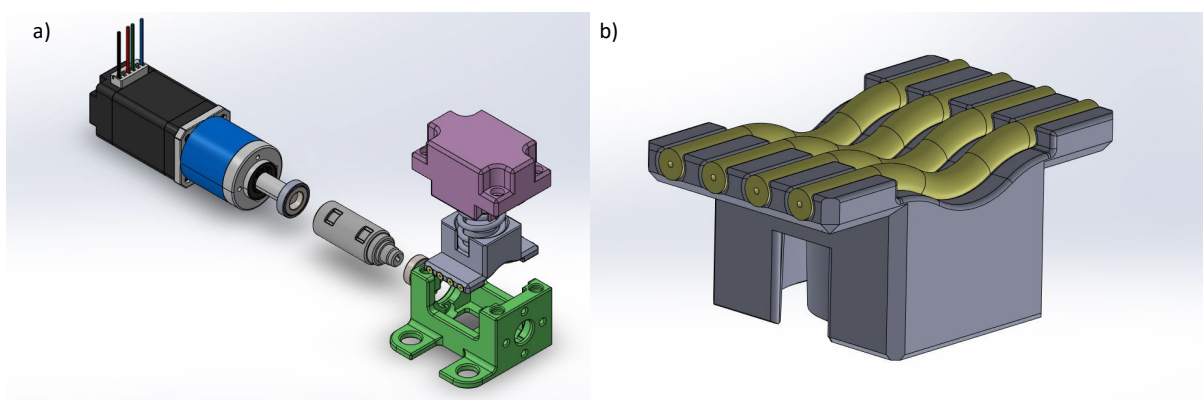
a) Exploded View of pump system, showing the roller that sits on the D-shaft of the stepper motor and the pump bed which the tubing is glued to. b) Close-up of the pump bed, showing the area that gets compressed by the roller.
